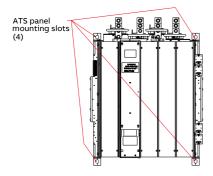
Automatic transfer switch mounting hole locations - 63L
